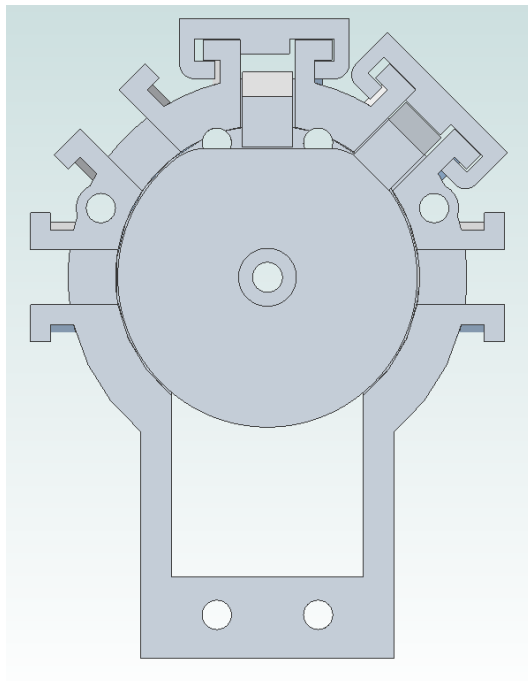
Drawing of 3D printed pinch valve assembly with face removed. The pinchers and center cam are laser cut from Delrin while all other parts are 3D printed. The left slot is normally left unused to provide a position where all valves are closed. Shown in the assembly are two assembled pinchers. The top pincher is in the open position while the upper right pincher is in the closed position. Tubes are fed through on the axis normal to the page.
